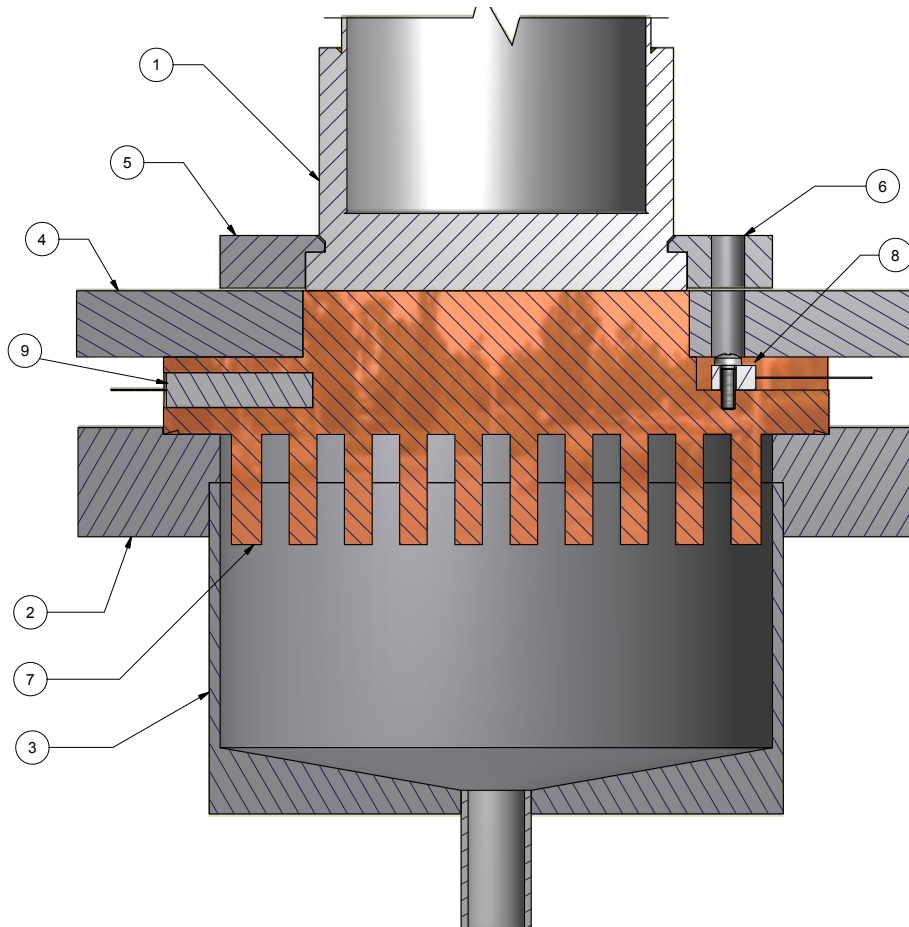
Sectional view of the cooling tower CAD drawing allowing a close look to the individual parts described in chapter 5. The main parts, except for the spiral gas inlet tube, are visible: 1. cryocooler, 2. CF100 weld in flange, 3. cryostat with integrated funnel, 4. top flange, 5.&6. cryocooler holding clamps (6. with an extra hole to screw the diode), 7. cold finger, 8. Si-diode, 9. heater cartridge. Drawing made by C. Huhmann (WWU Münster).
